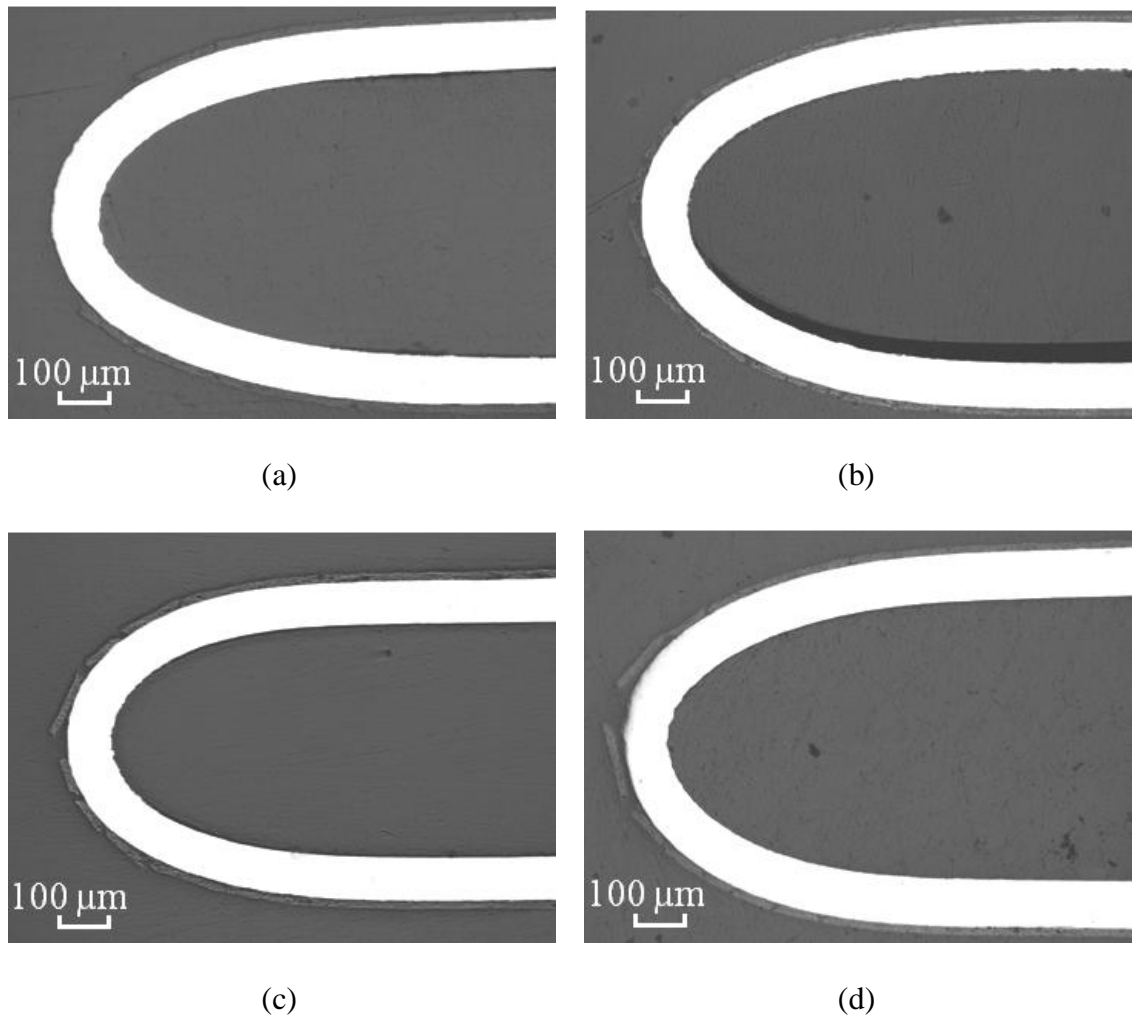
Optical micrographs of the cross sections of the one-sided coated stainless steel sheets, flattened to a separation distance of 0.5 mm with a bend radius of (a) 0.8 mm, (b) 1.0 mm, (c) 2.4 mm, and (d) 3.2 mm. The bend axis is perpendicular to the longitudinal direction.
